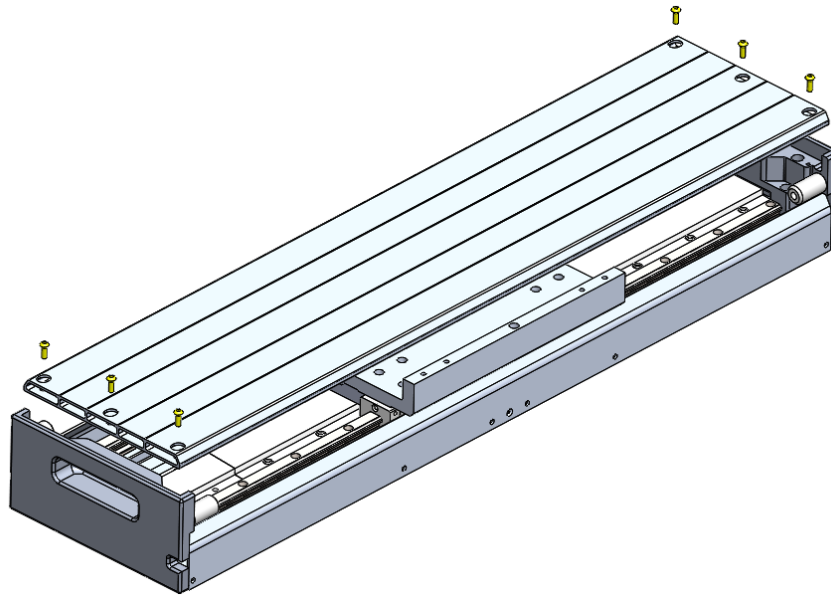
Exploded view of the cover – here for an LMSSA linear motor system
